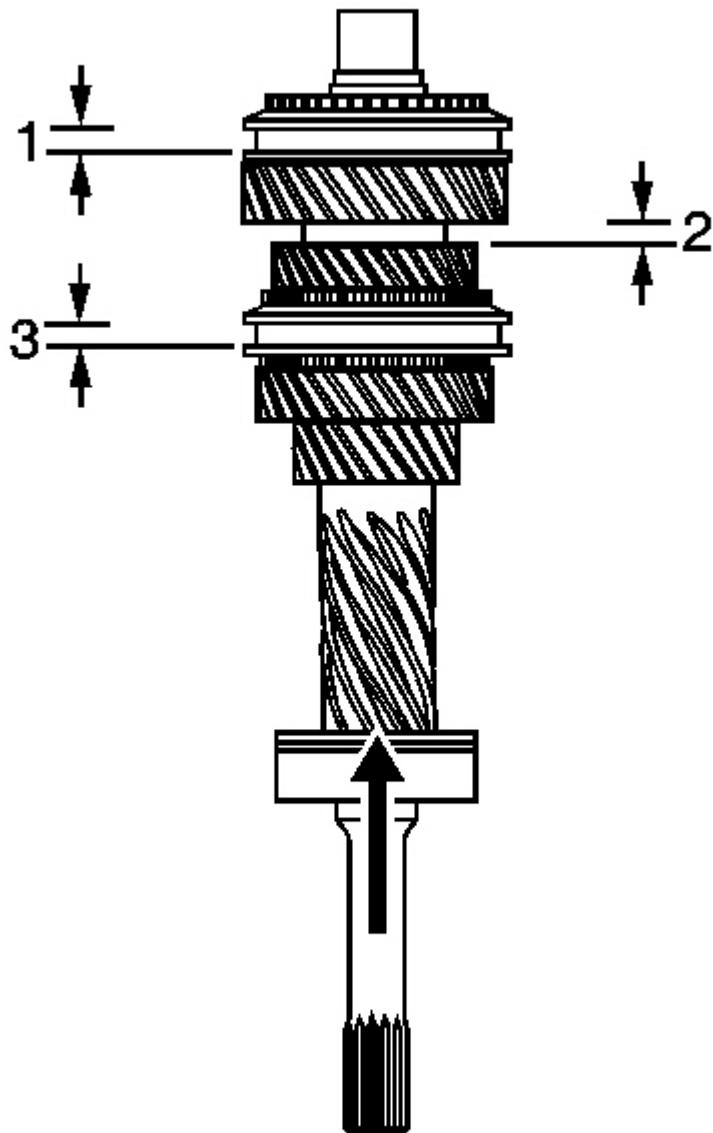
Inspecting 3rd, 4th & 6th Gear Axle Clearance
